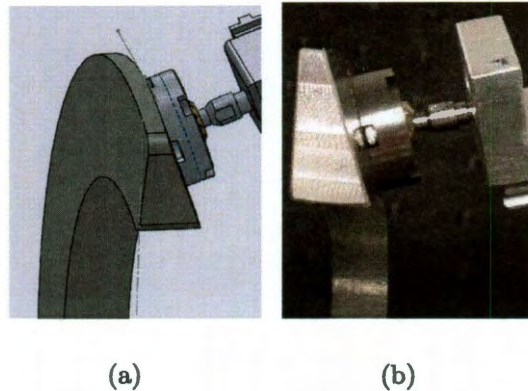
(a) CAD model of the wrist ring with inclined surface to increase wrist range of motion. (b) Manufactured inclined wrist ring attached to the spherical joint.
